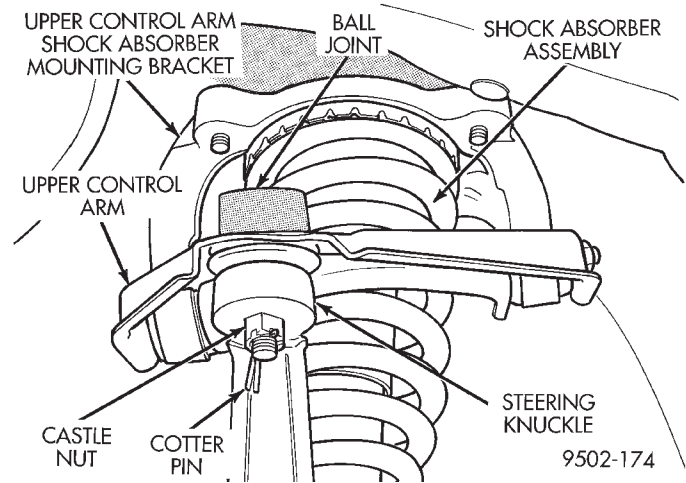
Upper Ball Joint Attachment To Steering Knuckle
